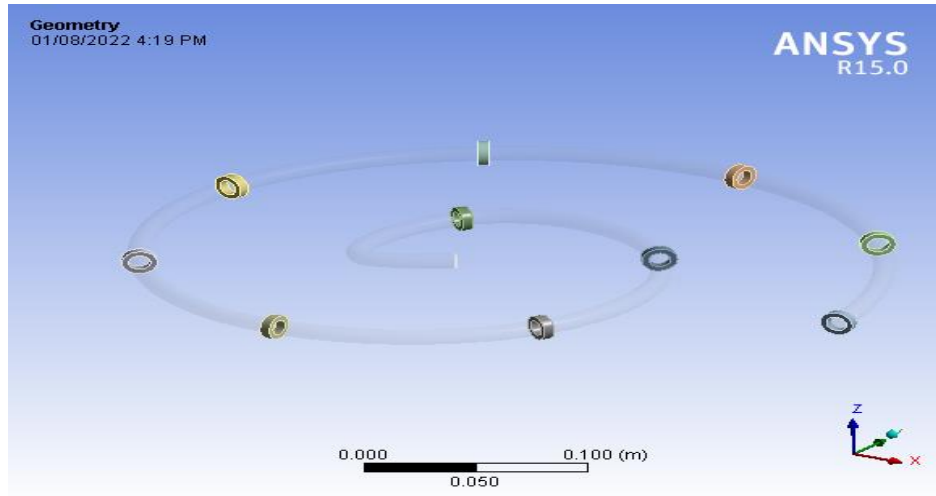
showing the geometric dimension of the spiral radiator with circular circumferential fins.
